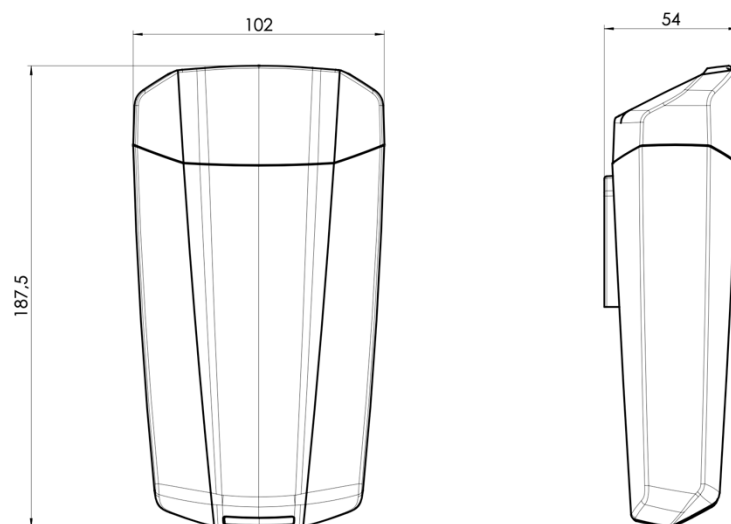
Dimension of the CorivaSat (IP20 Version)
